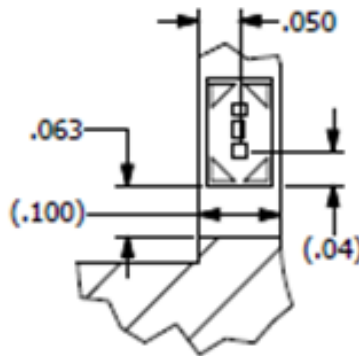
Typical Gage Placement on Thrust Section Measurement Beam
